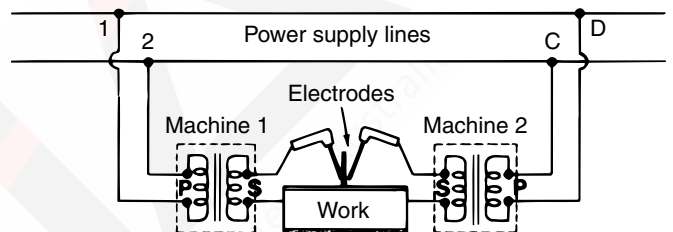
Safe Connection of Adjacent Welding Machines for Simultaneous Operation
